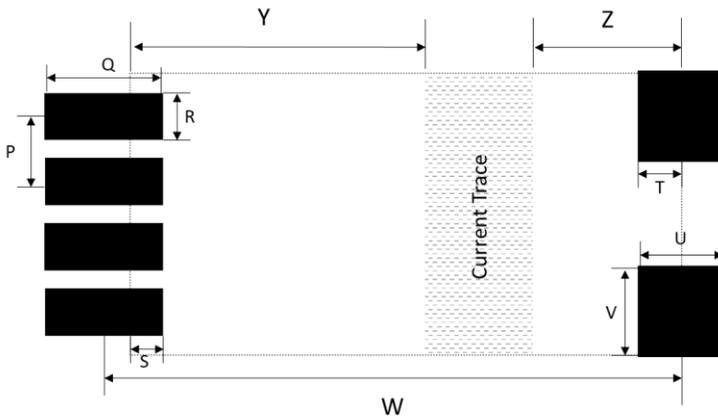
Recommended Hand Soldering PCB Footprint. The recommended Current Trace underneath – NO CONTACT- the sensor is 0.14" (3.56mm) wide.
